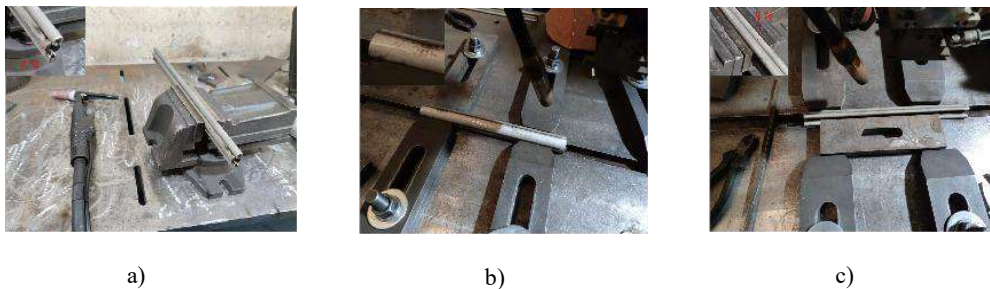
Welding process of O-core sandwich steel pipe
